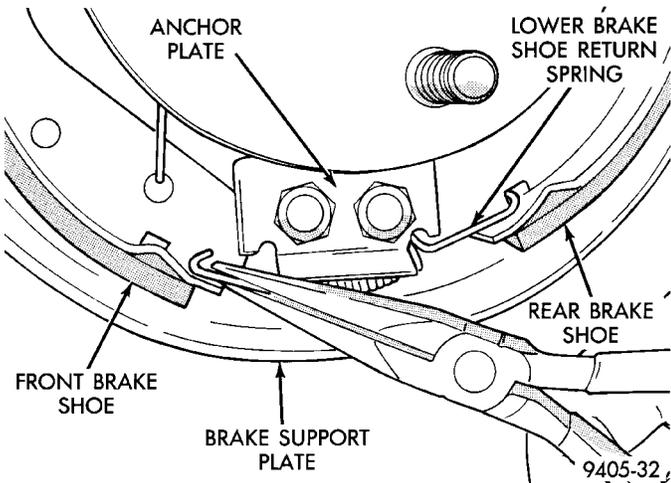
Brake Shoe To Anchor Plate Return Spring
